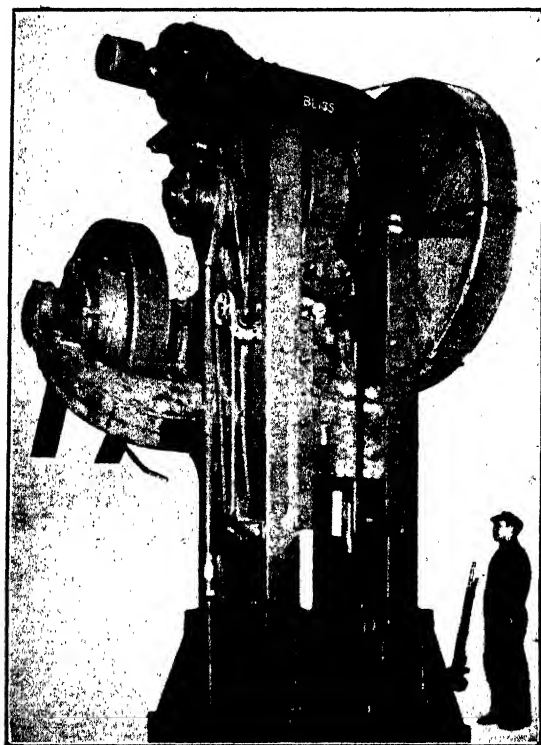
A relatively fast-acting eccentric shaft press used in the extrusion of the larger aluminum shells.
